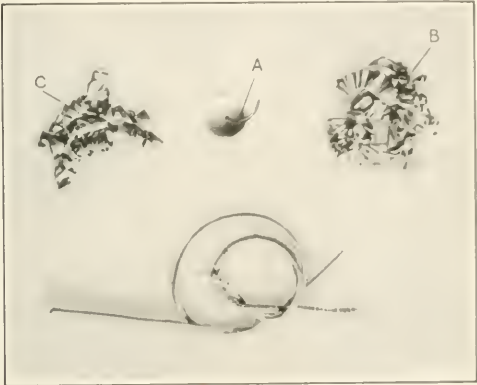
Samples of Turning and Drilling Chips and Disk A removed when "drilling for a wire"
